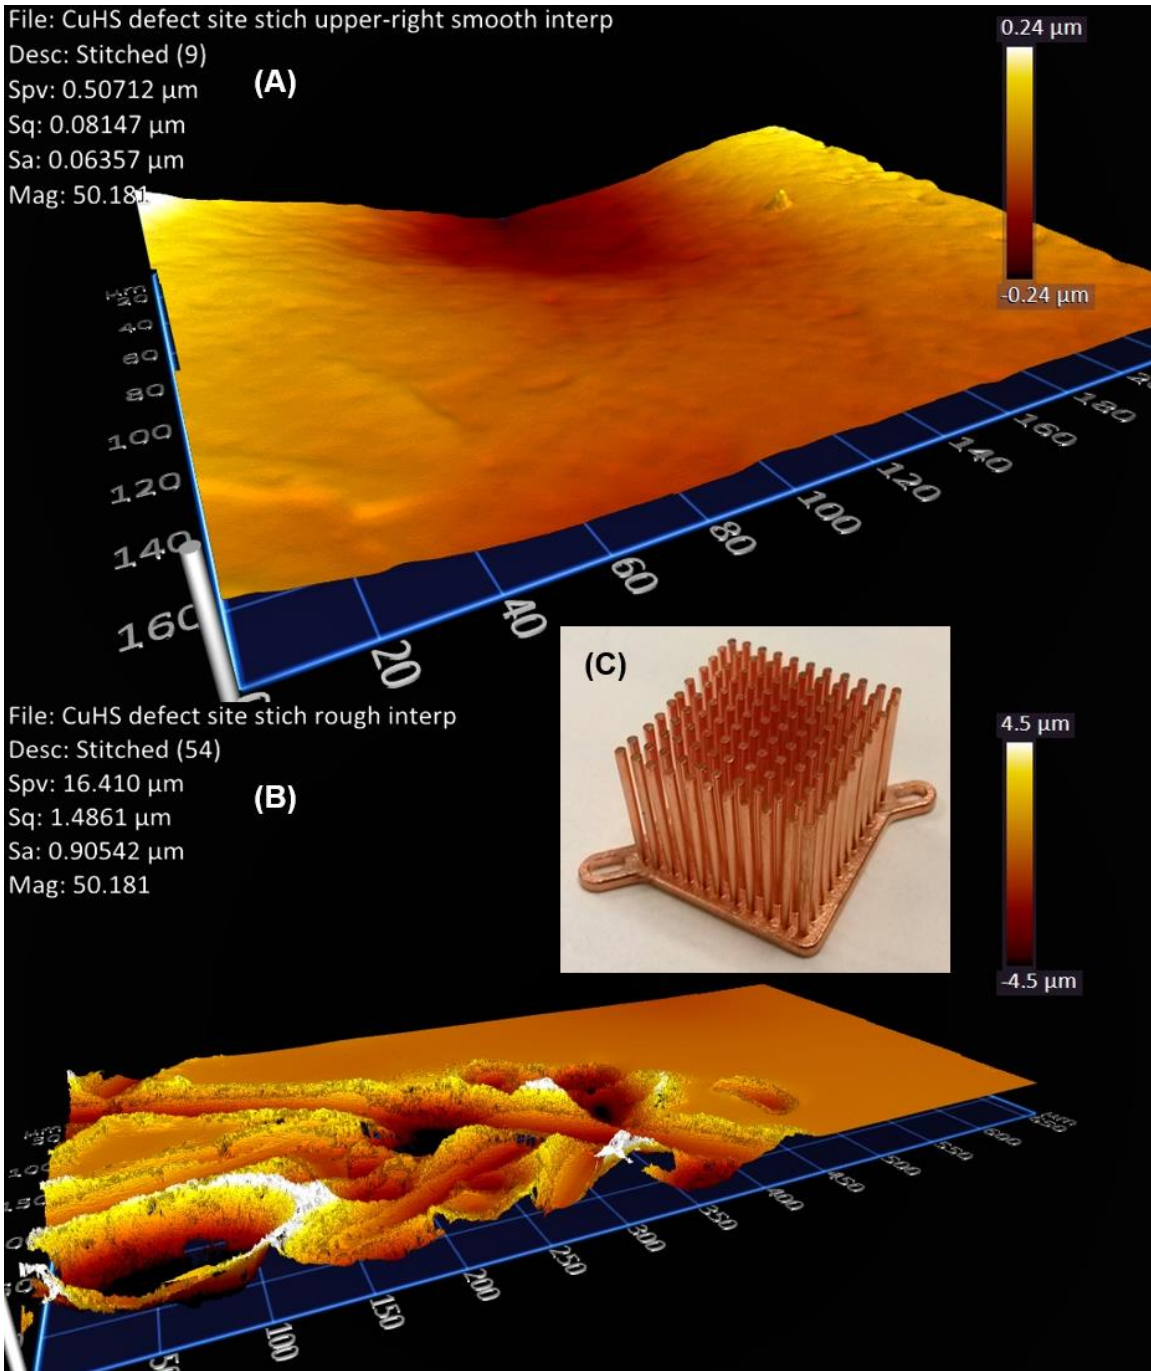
Surface profile of (A) the mirror finish and (B) a defect of the Enzotech CNB-SI forged copper heat sink along with (C) a photo.
